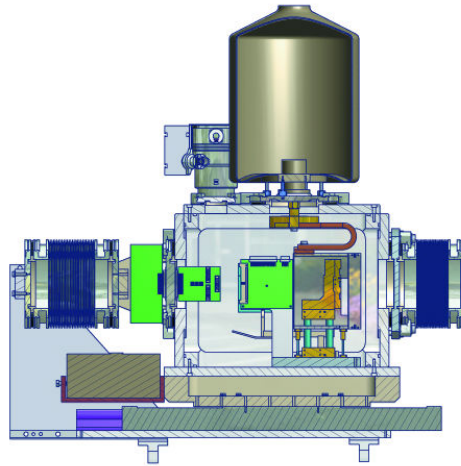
Cross section view of the detector vacuum cryostat.
